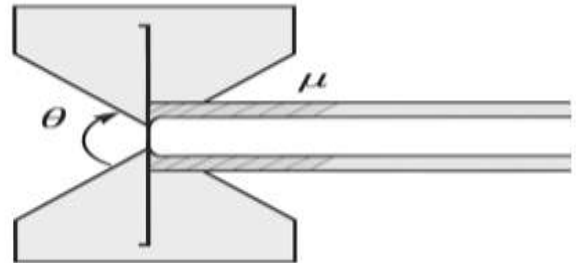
Schematic of Die Geometry Parameters and Tube-Die Contact Interface.
